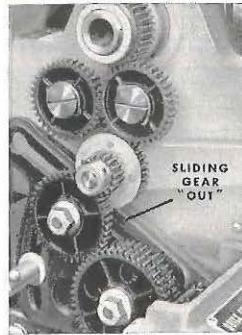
Sliding Gear in OUT Position—meshes with the 16 tooth compound gear.
